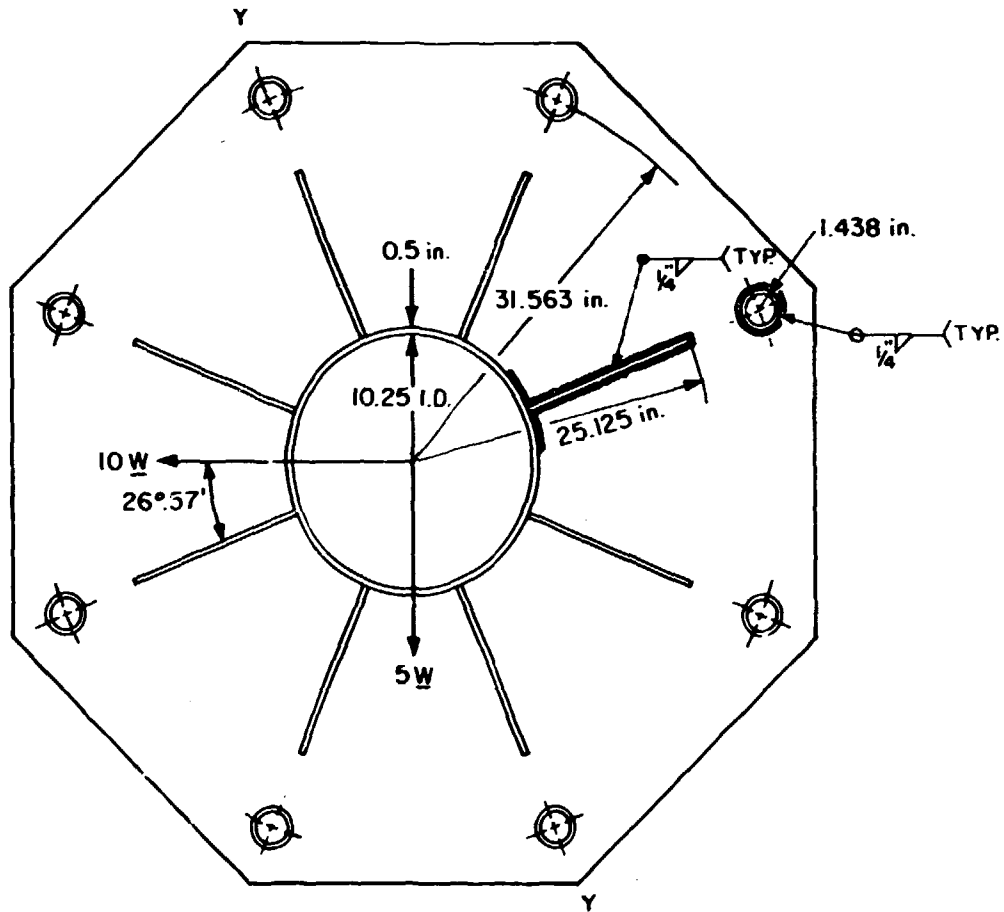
Cross section of welds between support struts, gussets, and collar and base plate.
